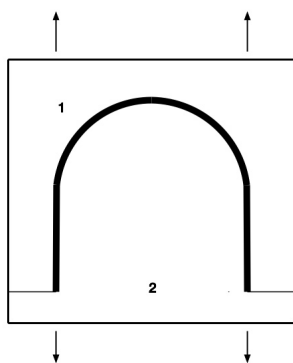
The two parts of a mould for the simplest green sand casting, that of an un-bellied pot.
